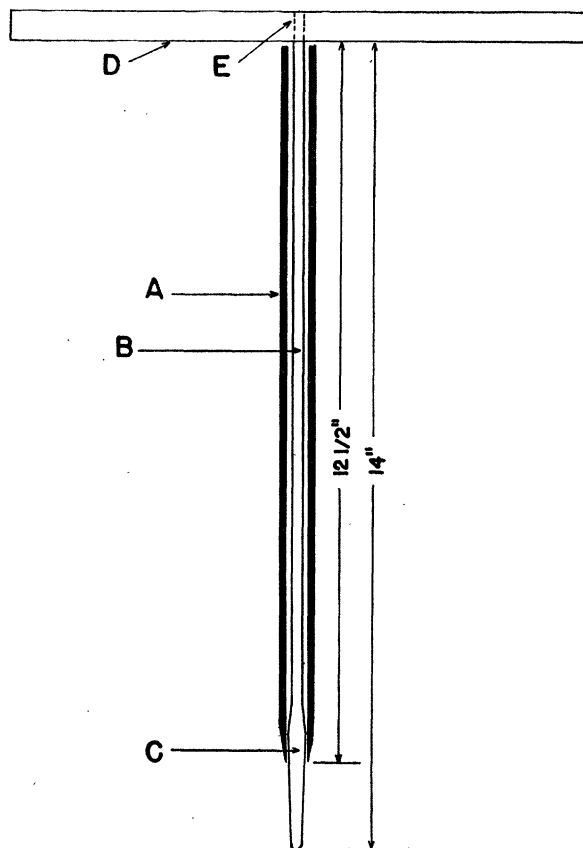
Assembled injection apparatus. A—standard $\frac{3}{4}$ -inch pipe; B— $\frac{3}{4}$ -inch steel rod; C—enlargement tapering toward point; D—pipe handle; E—weld.
